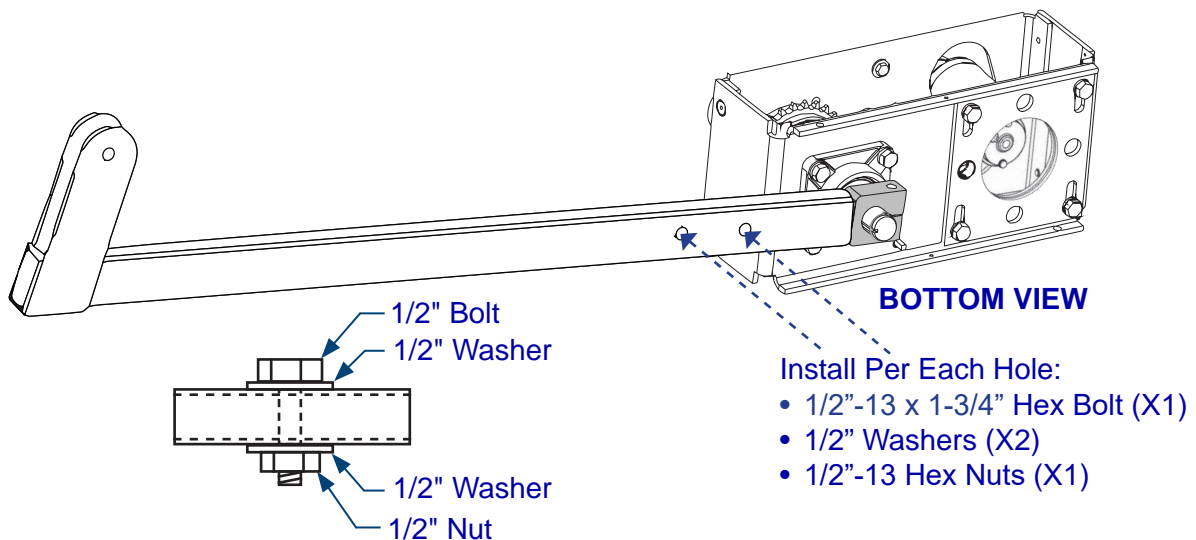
Primary Arm Installed to Collar of the Main Drive Shaft (Bottom View)
